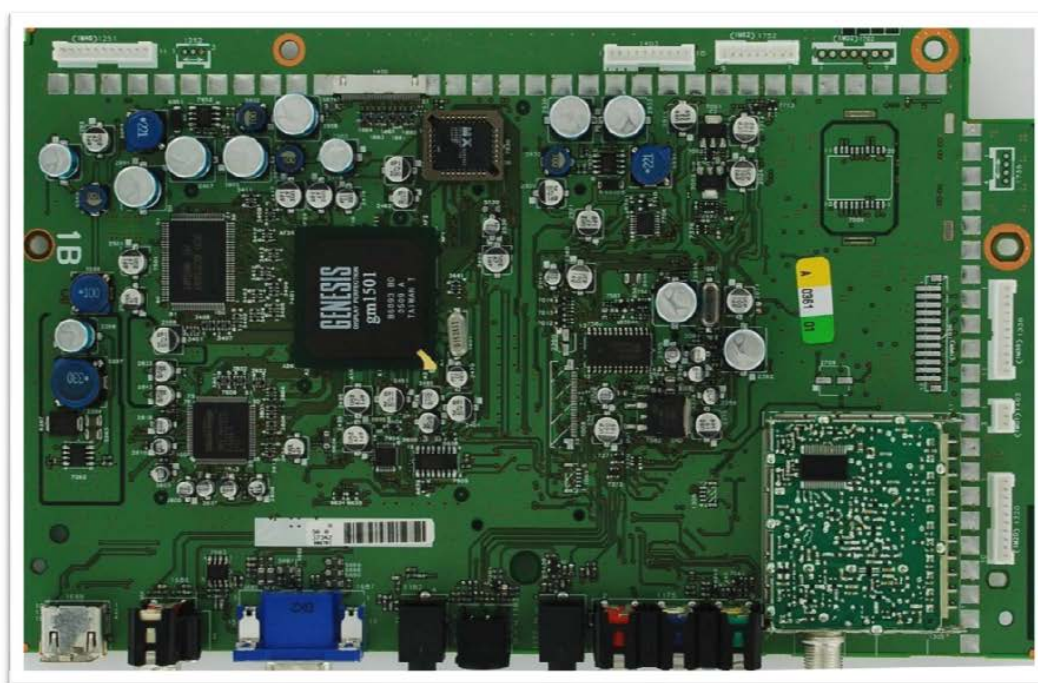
A circuit board assembly with hundreds of SMT components and thousands of solder joints
